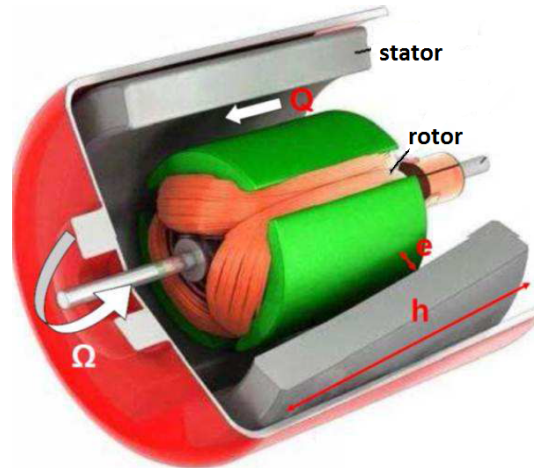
Exploded view of an electrical motor and its rotor-stator gap.
